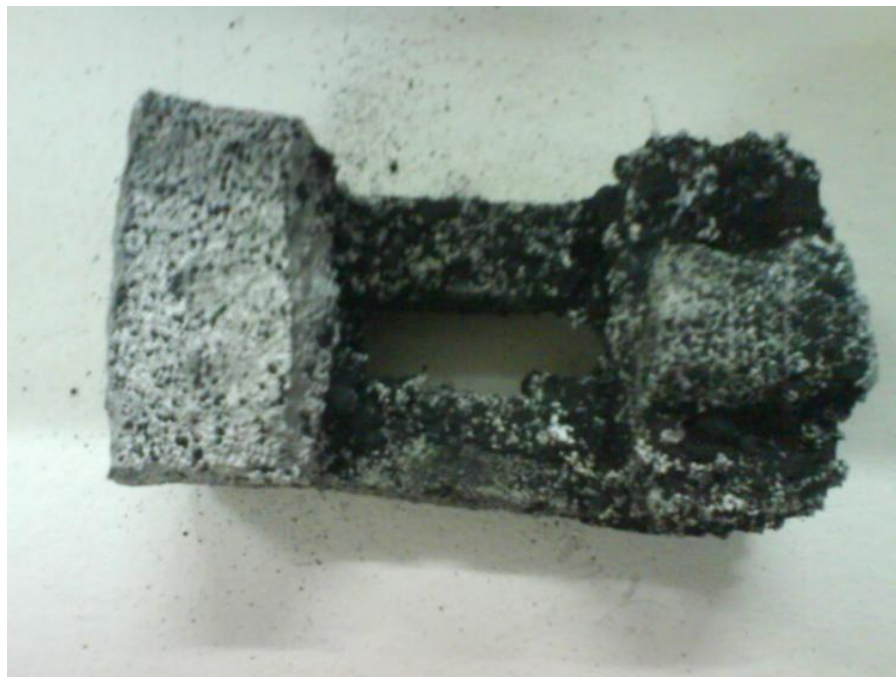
Green Sand Casting with Coating (Top View)
